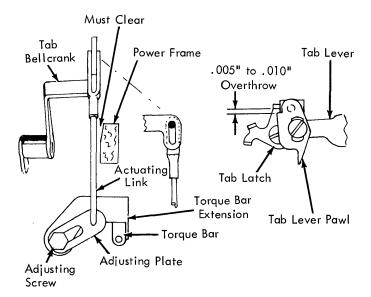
Adjusting Plate, 11 Inch Machine
